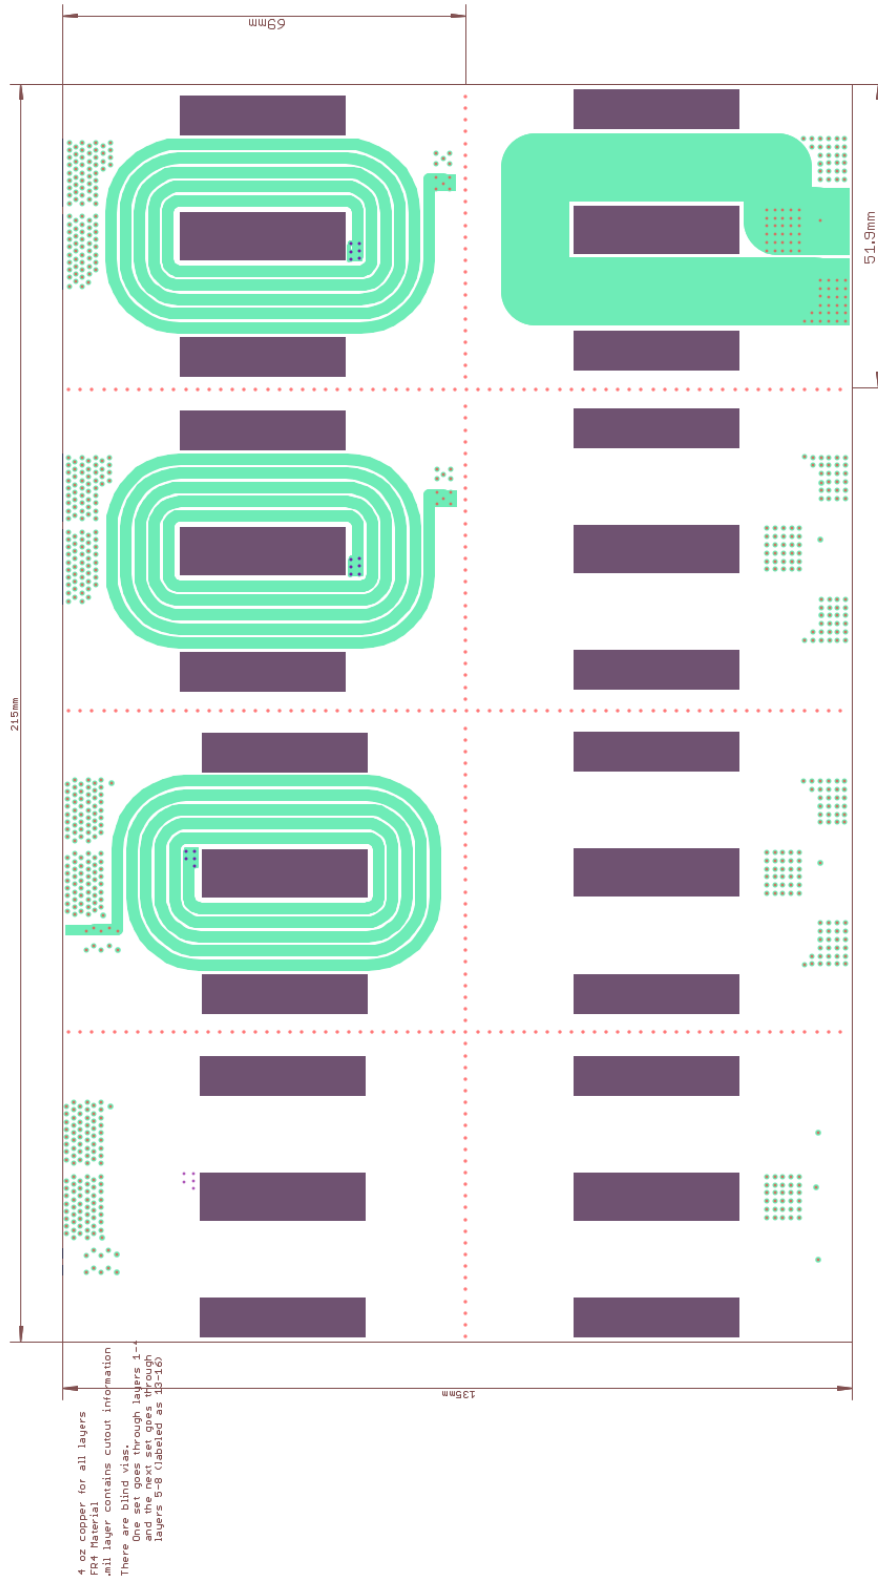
Layer 5 of the ICN transformer PCB winding (located in the top left) and other magnetic component variants. The purple rectangles indicate cutouts in the board.
